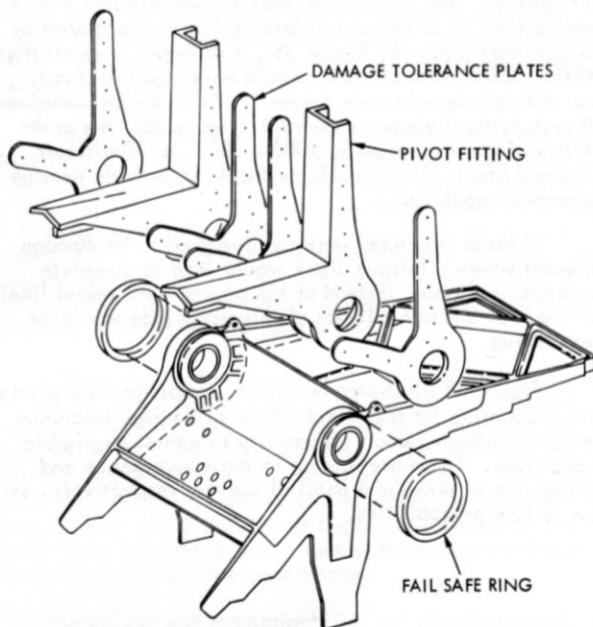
C-5 Horizontal Stabilizer Pivot Fitting
